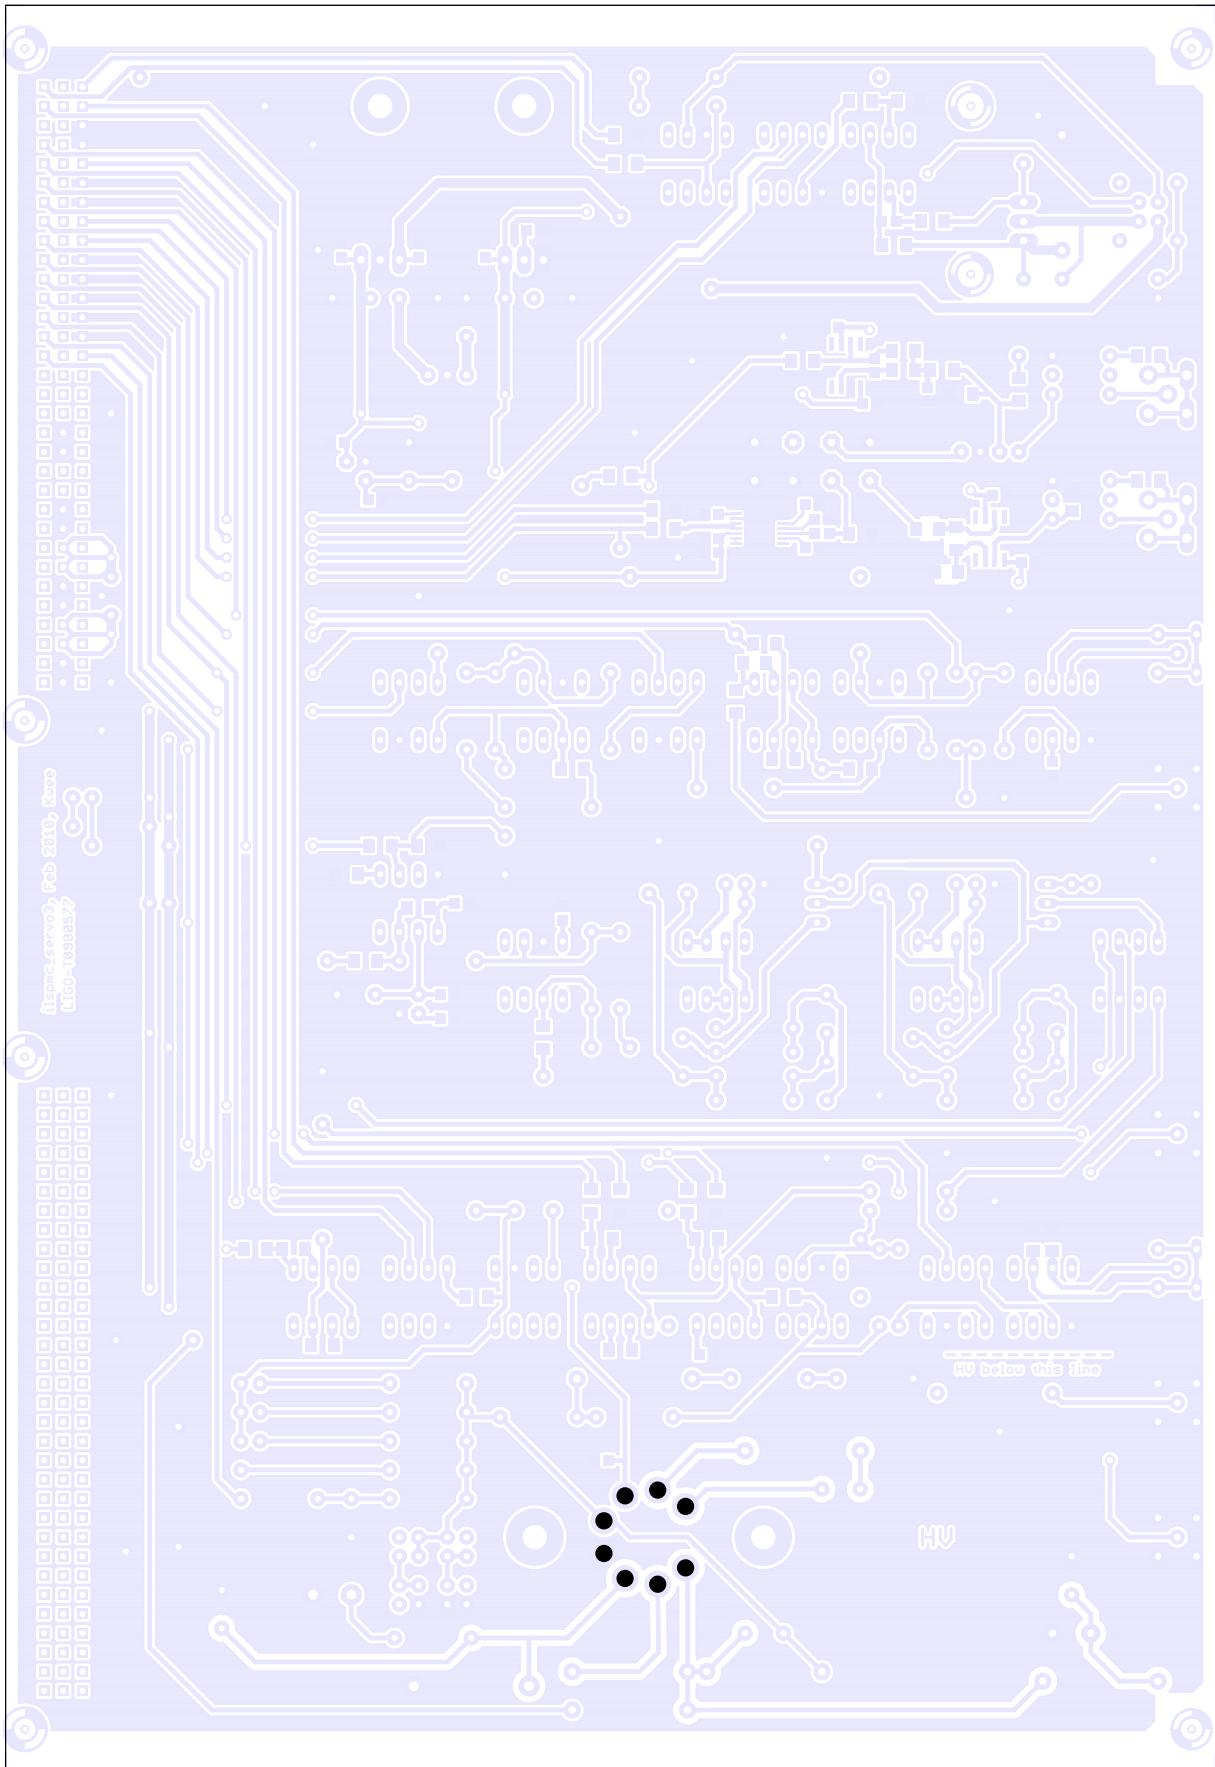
Board bottom view showing drills with 2.3 mm (0.090 in) diameter
